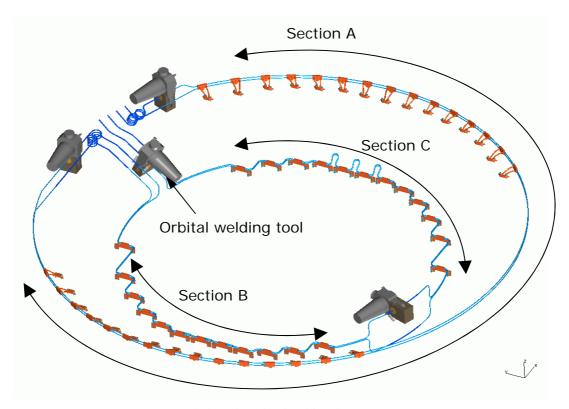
Evaporator set-up including the orbital welding locations.
